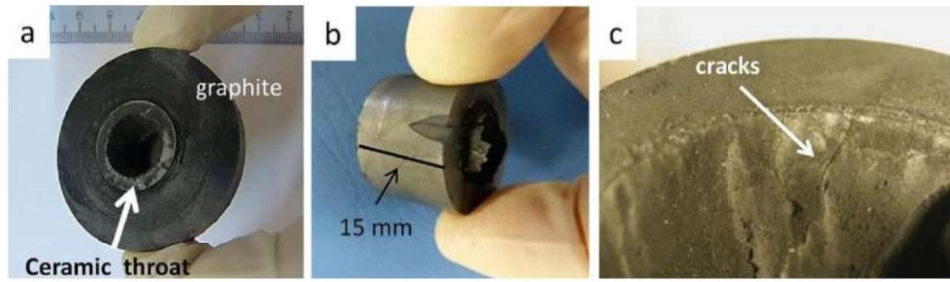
(a) Segmented nozzle (after removal of the converging outer element), (b) ceramic throat, (c) details of the ceramic throat showing radial cracks [10].
